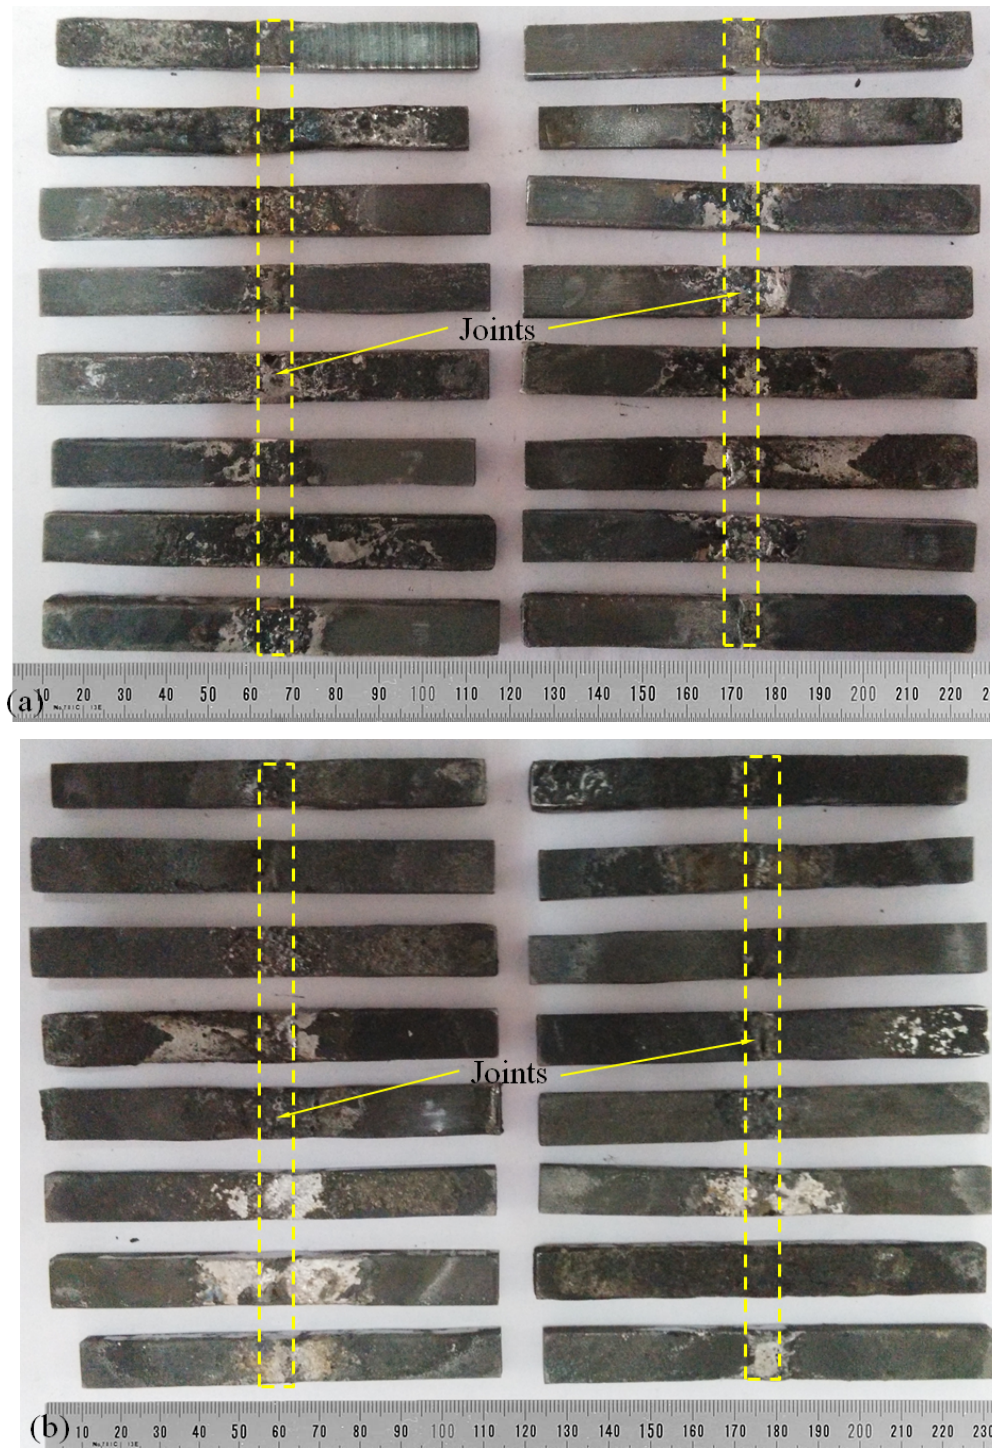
As-welded Inconel-625 tensile specimens at (a) 900W (b) 600W power levels
